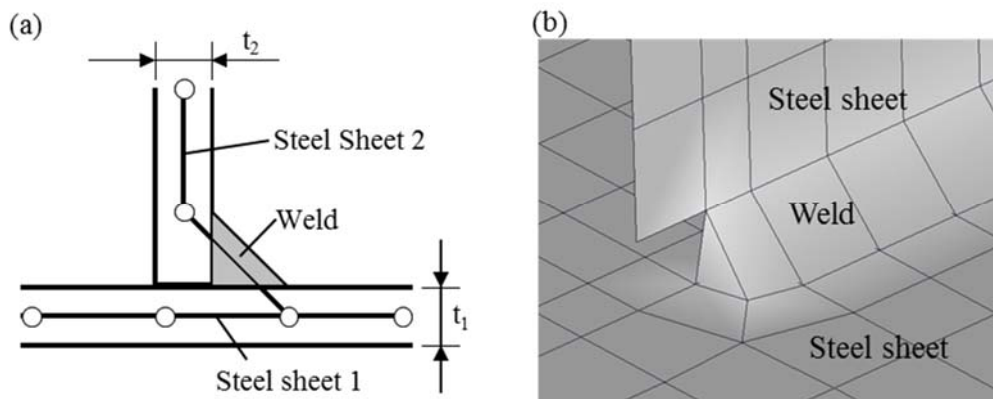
Example of arc weld of FE model. (a) Cross-section of weld connection between two thin sheets, (b) weld end.
